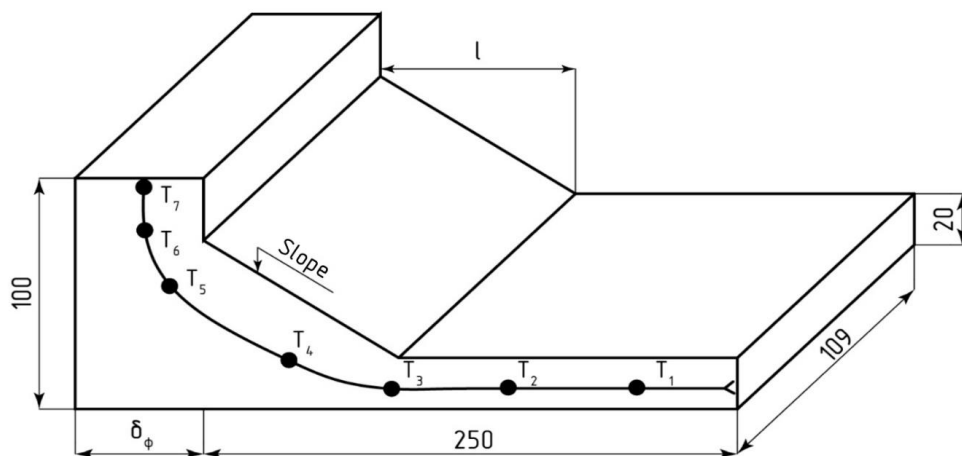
Type of L-Shaped Sample without Profit: T1 ÷ T7– Installation Points of Thermocouples.
